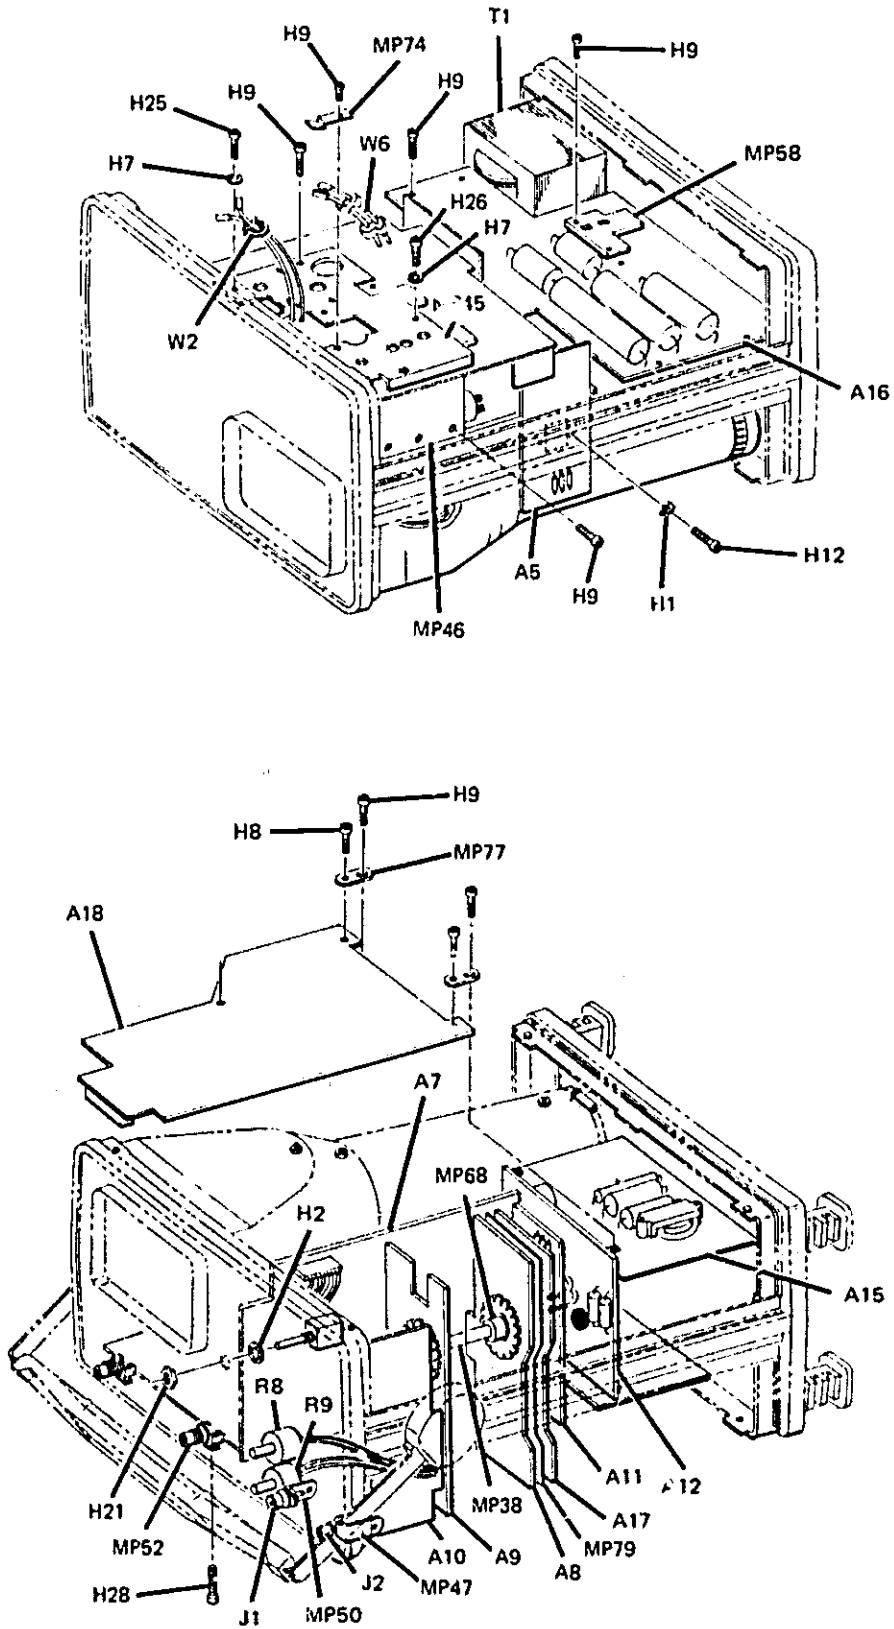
Chassis Parts and Board Assy Identification (Sheet 3 of 3)
